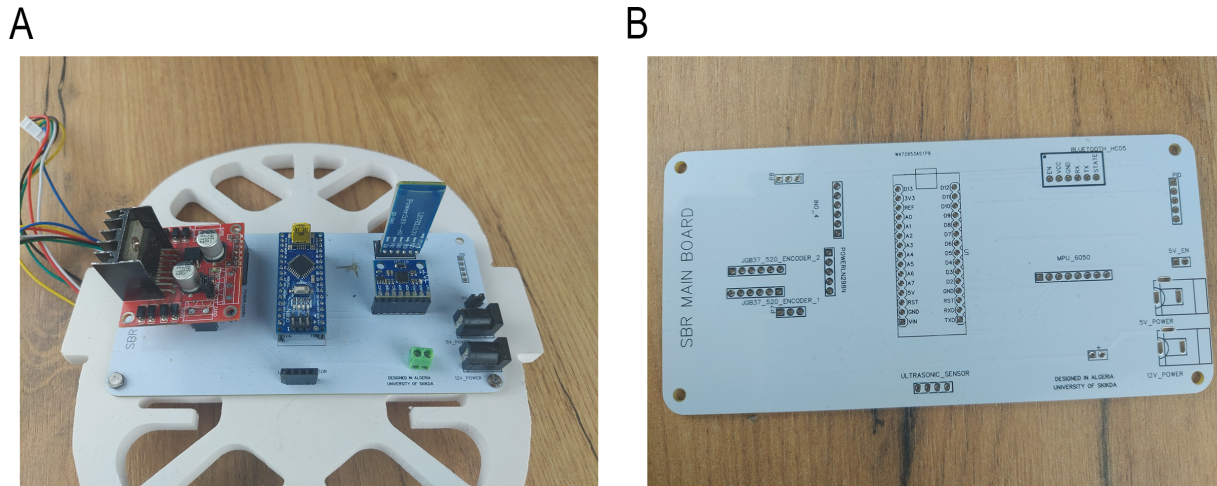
(A) Assembled self-balancing robot control board featuring Arduino Nano, motor driver, MPU6050 module and HC-05 Bluetooth module mounted on the middle plate of chassis. (B) Corresponding unpopulated PCB highlighting the layout and circuit design for the control board.
